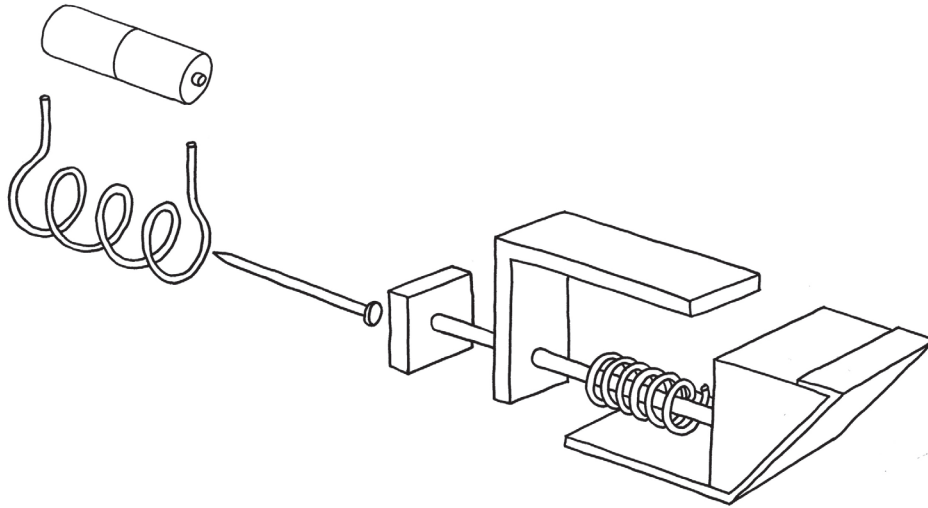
A 3D assembly drawing of the parts inside an electric door lock
